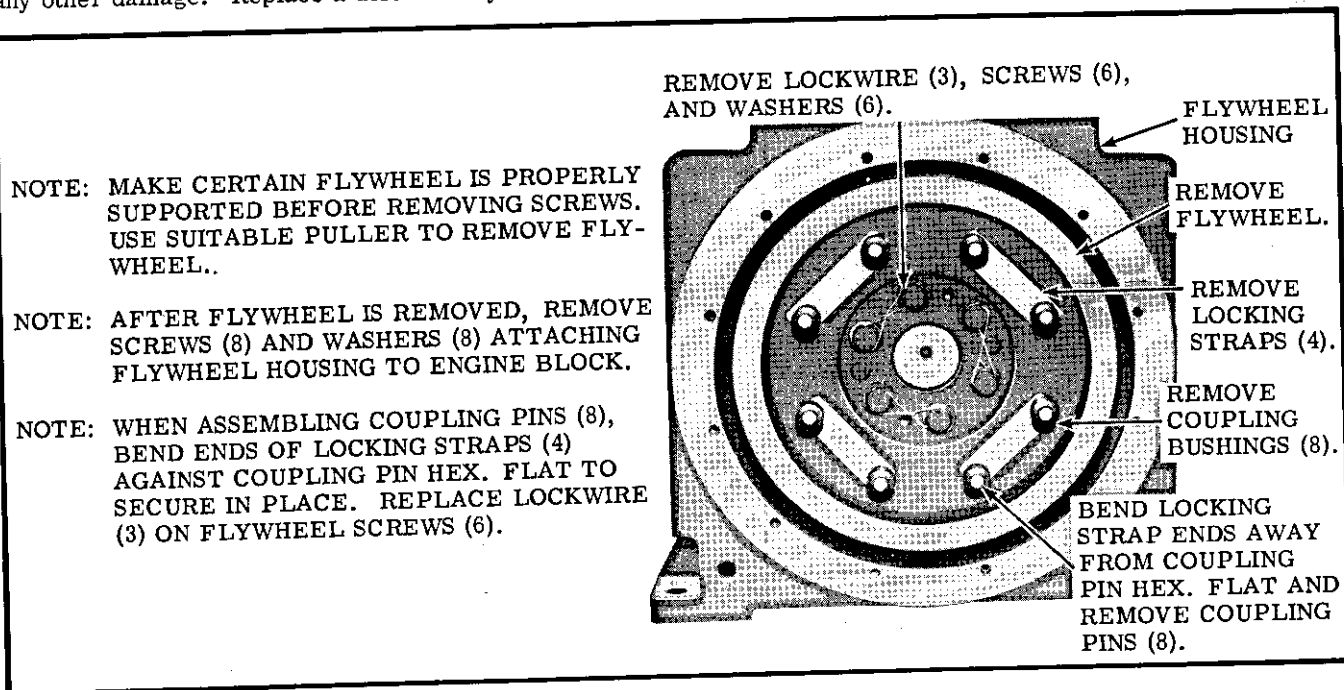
Engine Flywheel and Flywheel Housing, Removal and Installation
